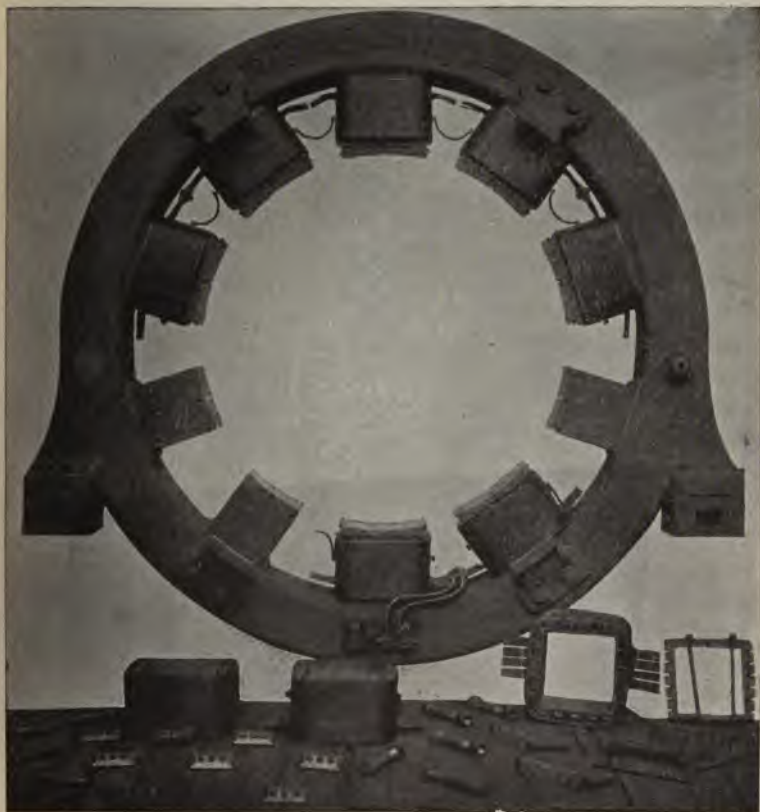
MAGNET-FRAME OF 10-POLE MACHINE.
